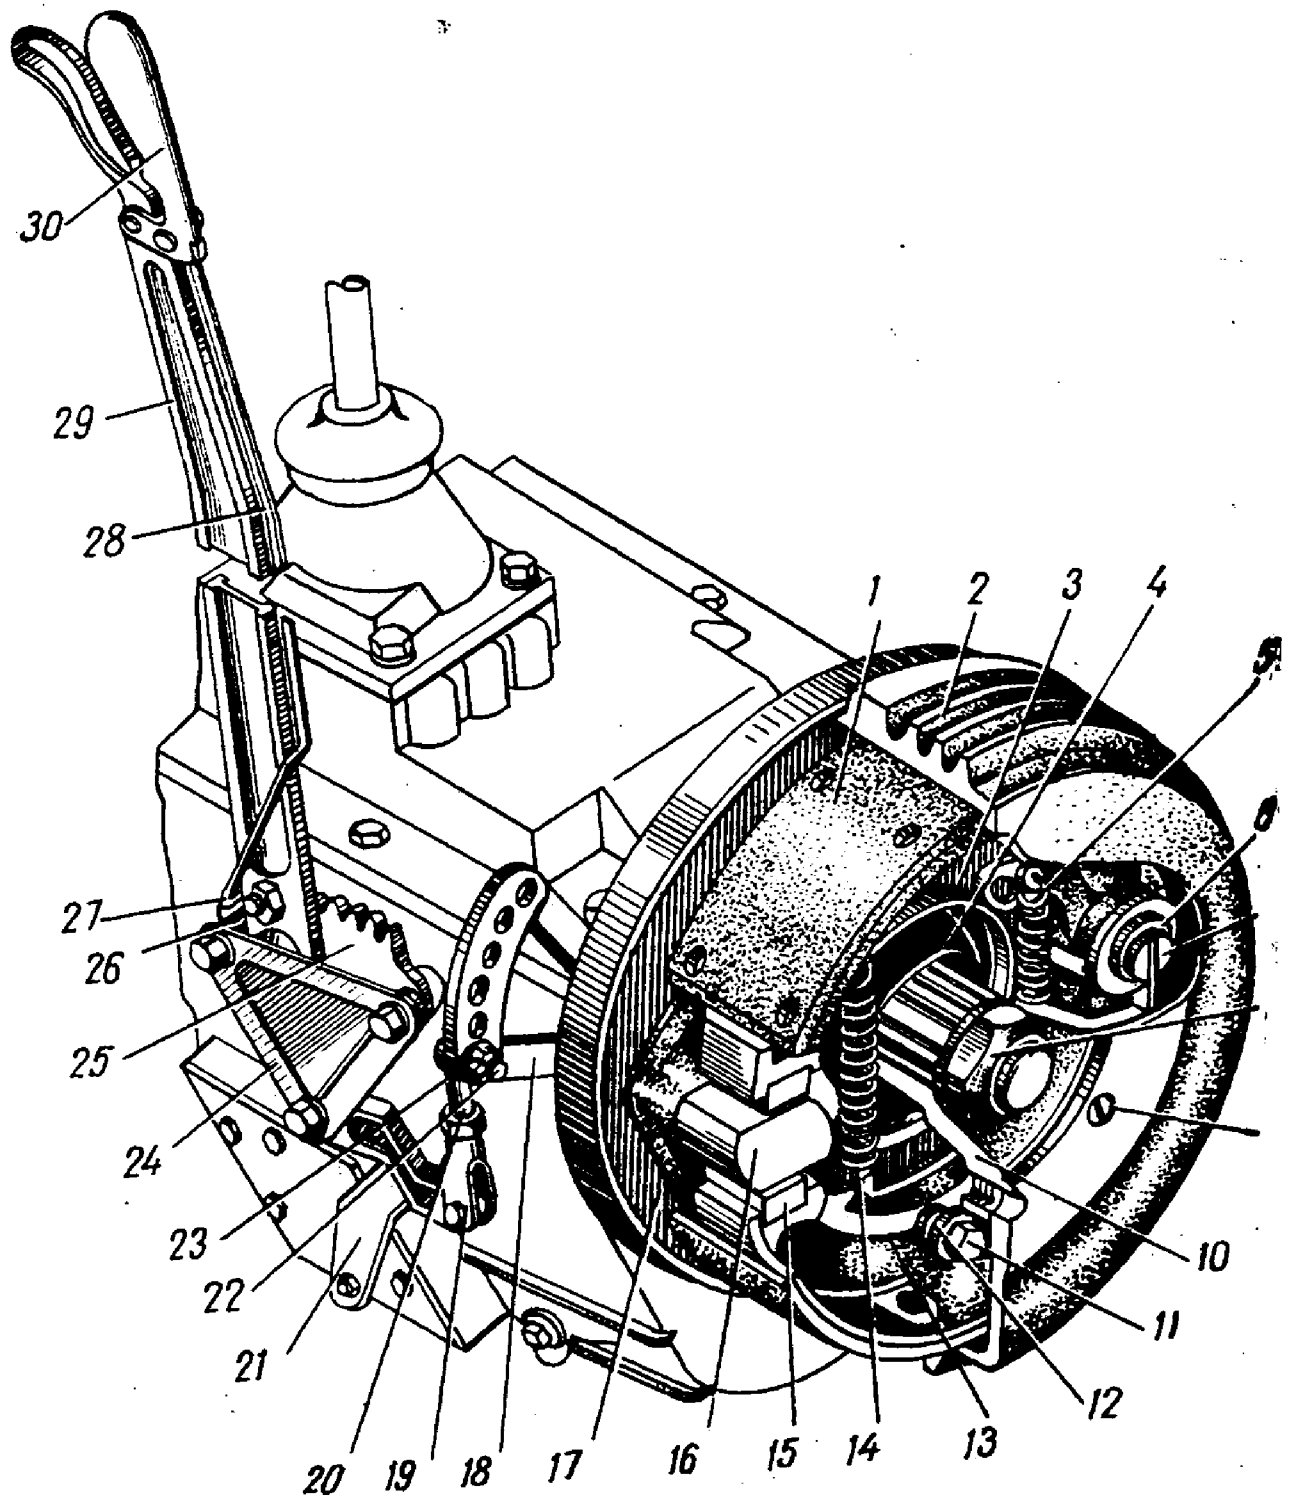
HAND BRAKE OF ЗИЛ-130 TRUCK
